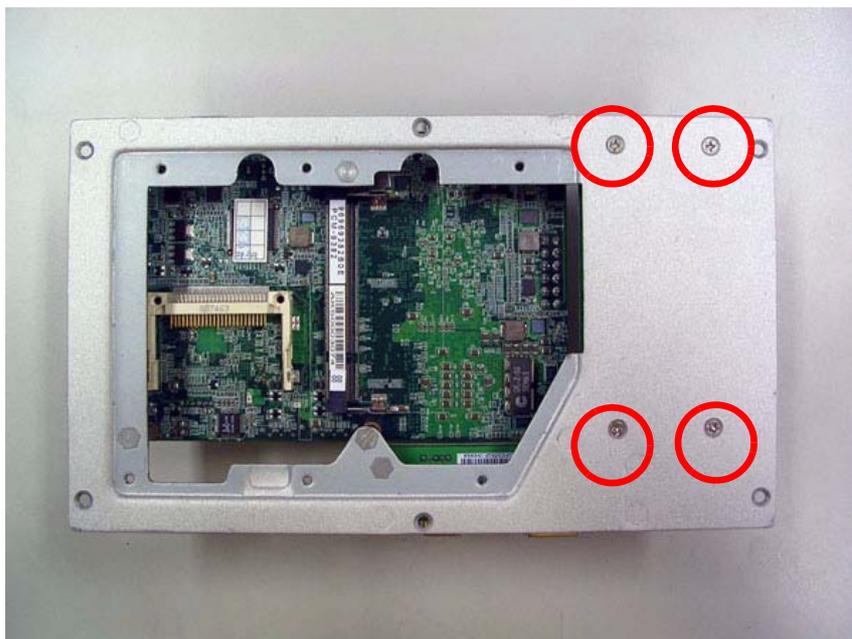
Unscrew the power module screws on the bottom to disassemble the power module
